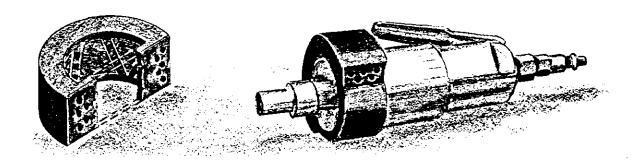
Muffler shown removed and mounted on pneumatic tool.
